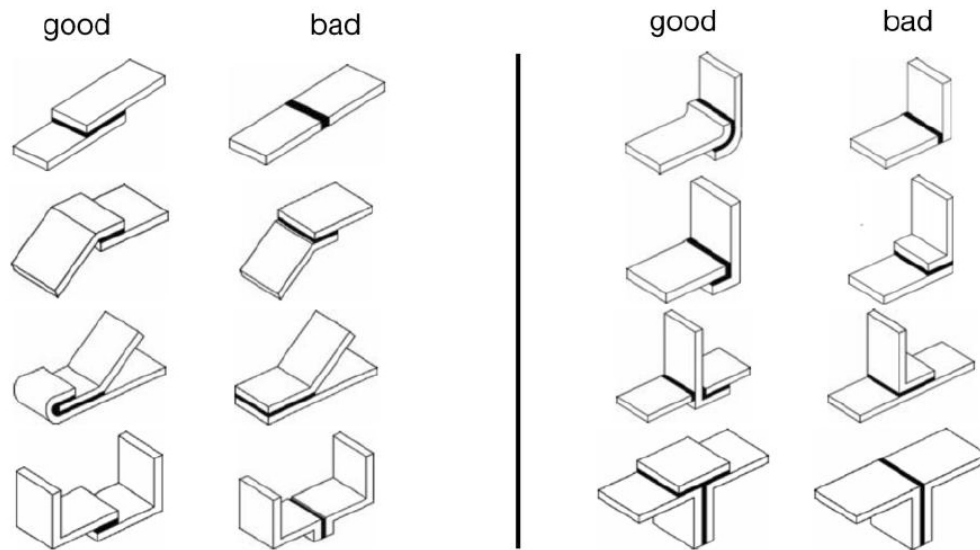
Examples of good and bad adhesive joining methods [55]
